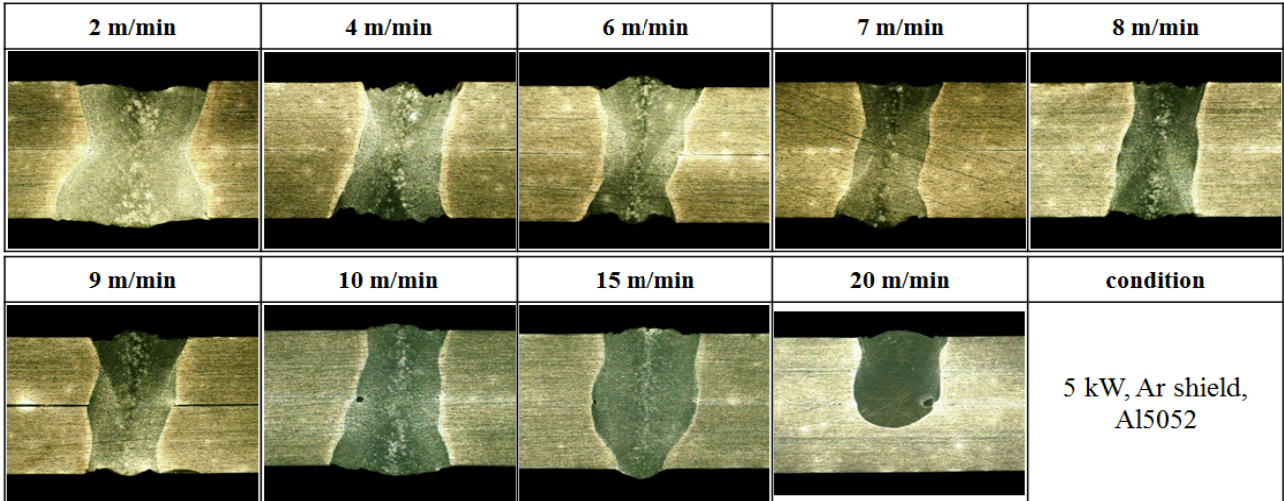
Cross-sectional images of Al5052 laser lap welding by change welding speed at 5 kW laser power
